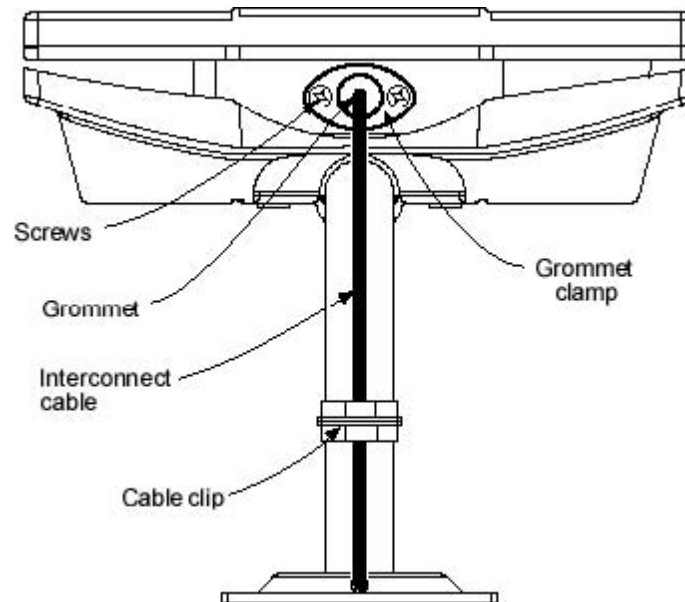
Interconnect Cable Installation to Outdoor CPE - Bottom View
